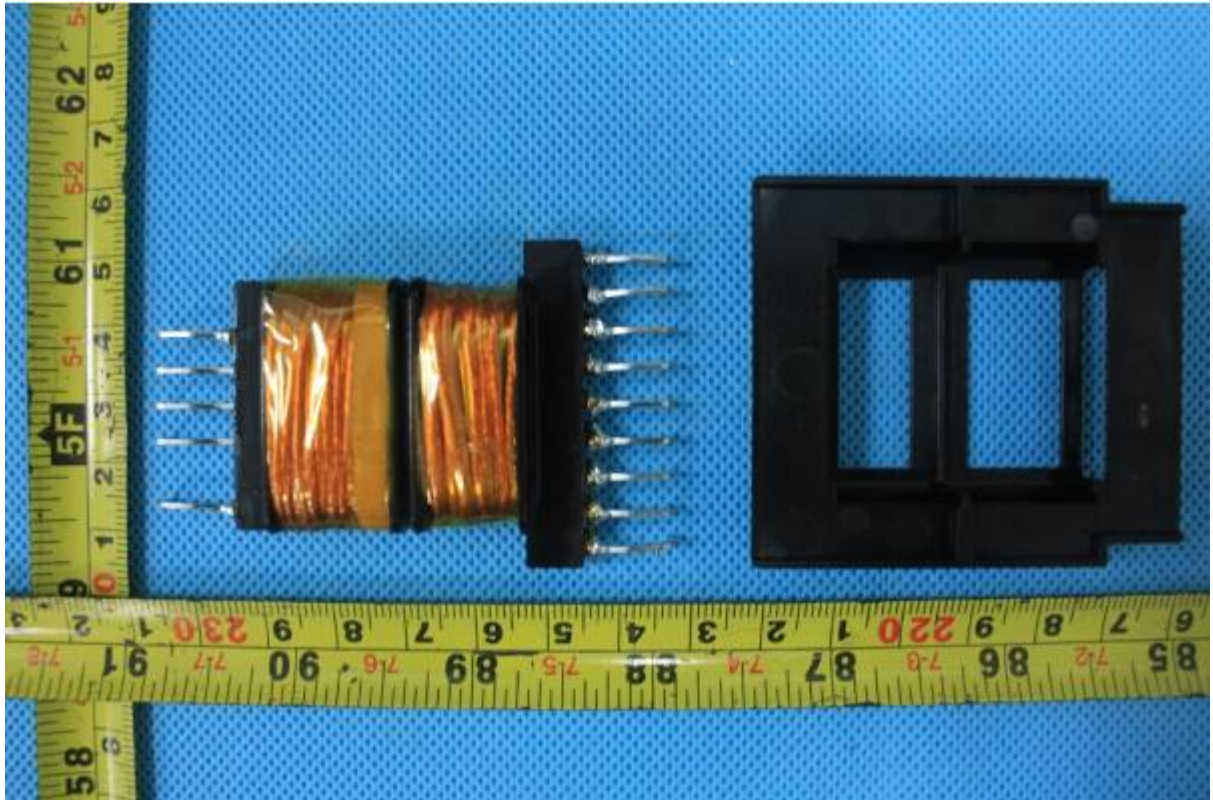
Transformer T2 (with top cover sheet removed, min. 4.0 mm margin tape used between primary winding and middle bobbin)
